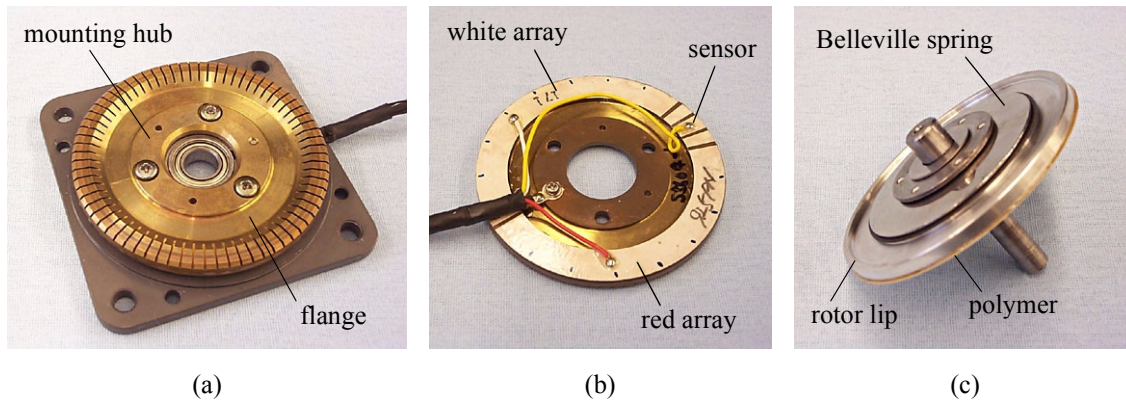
Components of the Shinsei USR60: (a) the mounted stator, (b) back side of the stator showing the piezo arrays, and (c) assemblage of the rotating parts.
